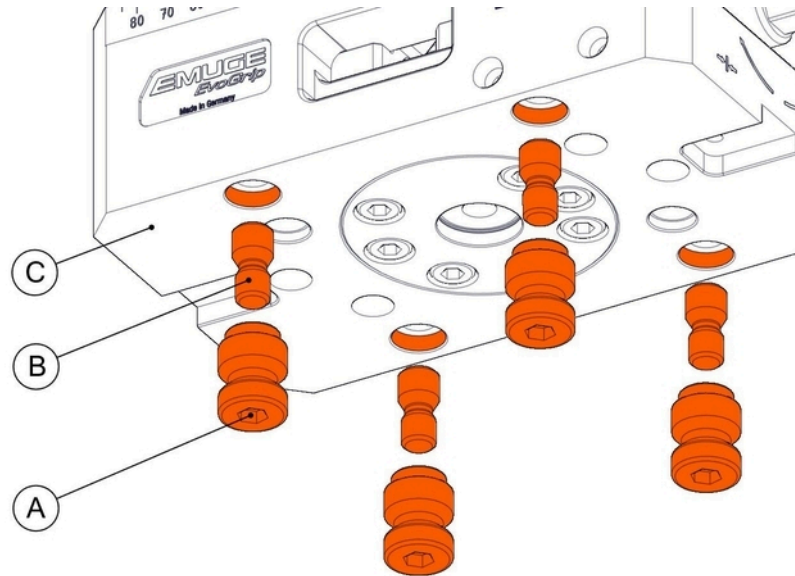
Schematic illustration: Assembly / disassembly of the locating bolts for compatible zero-point systems
